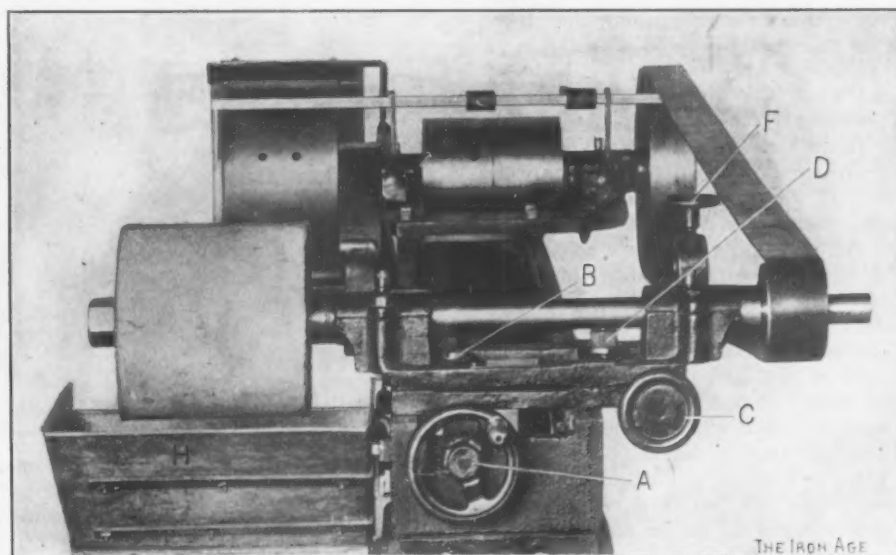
The Idler and Belt Removed and the Machine Arranged as a Roller Sander.
